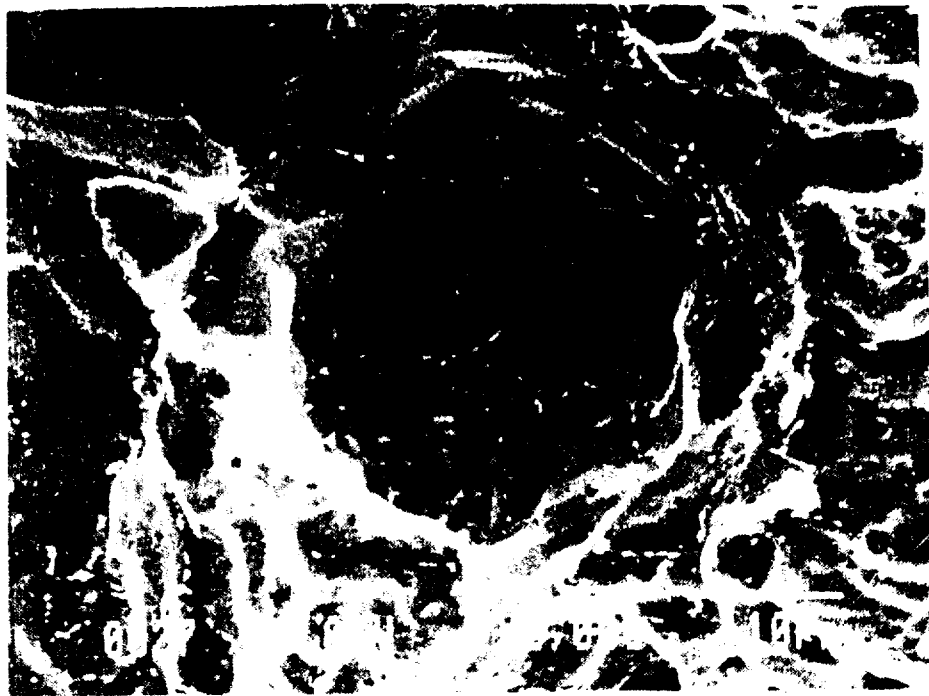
Fractographic Details Of Circumferential Cracking
